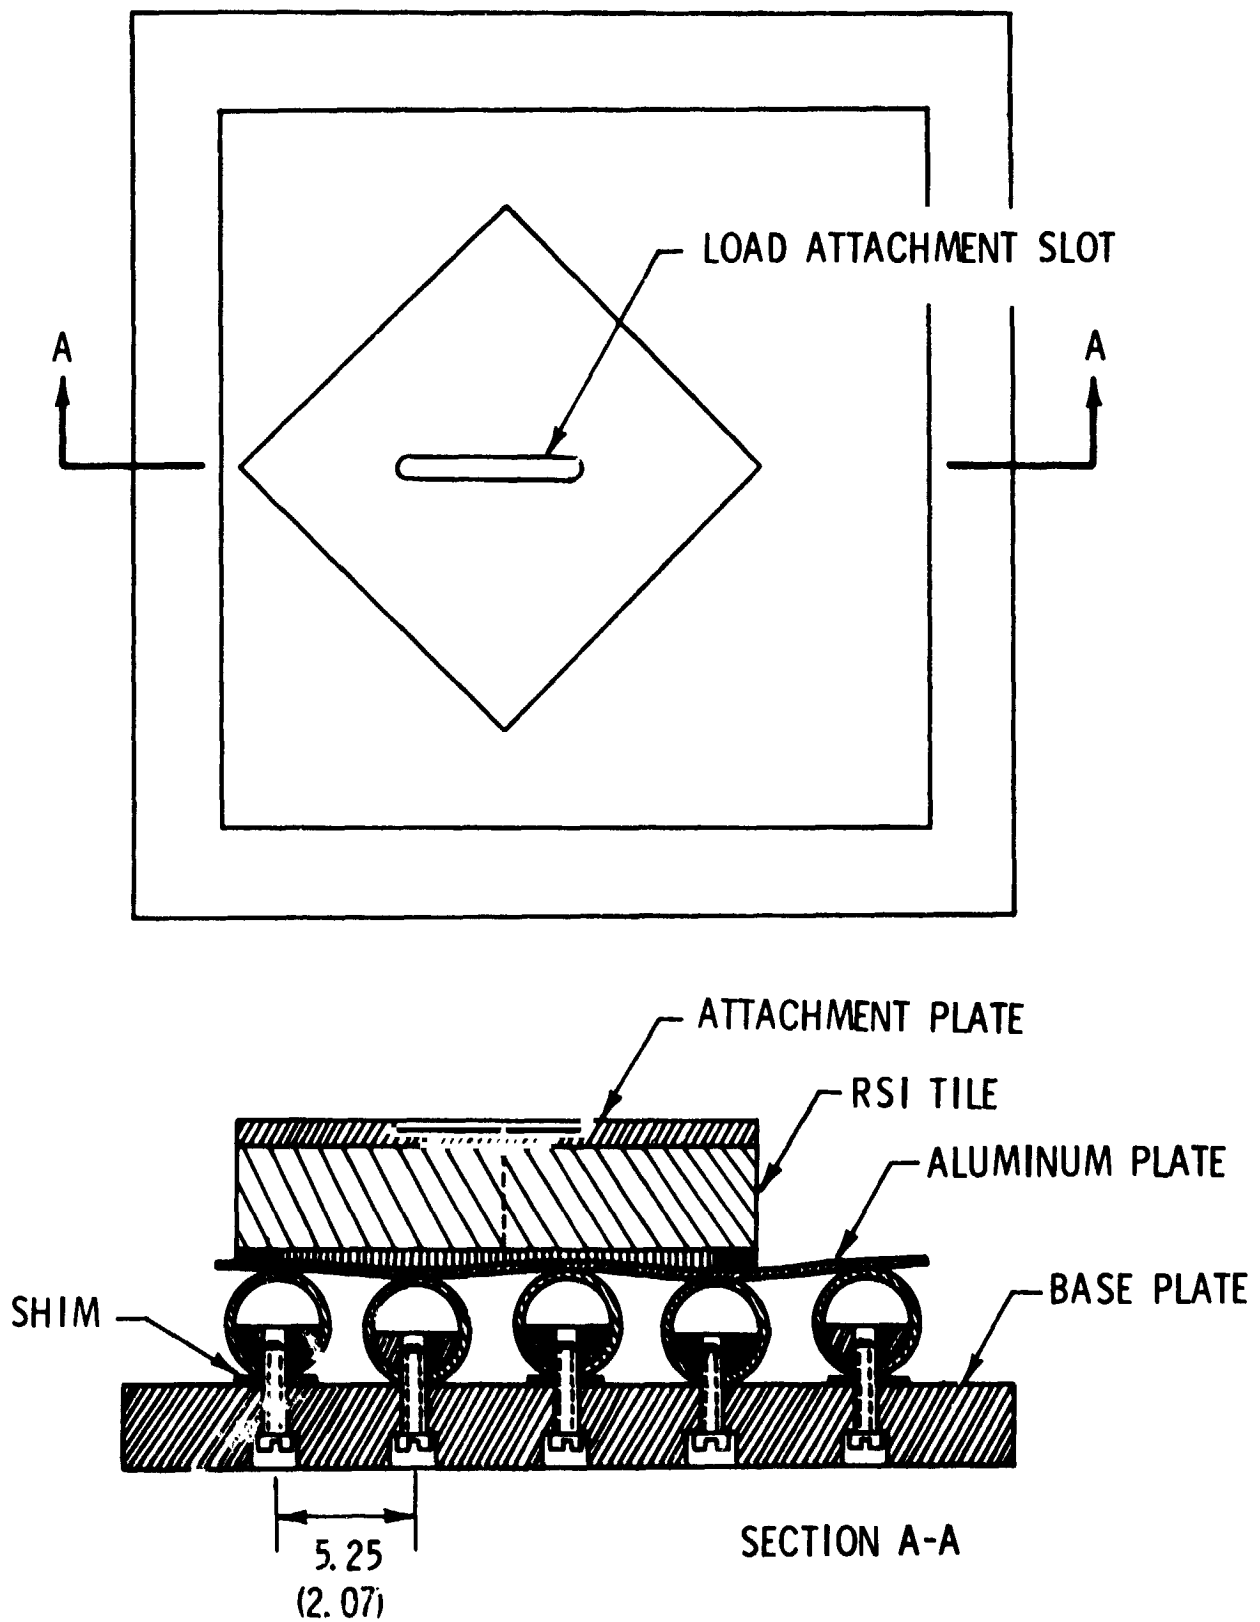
TPS test specimen and test fixture. Dimensions are in centimeters (inches).
